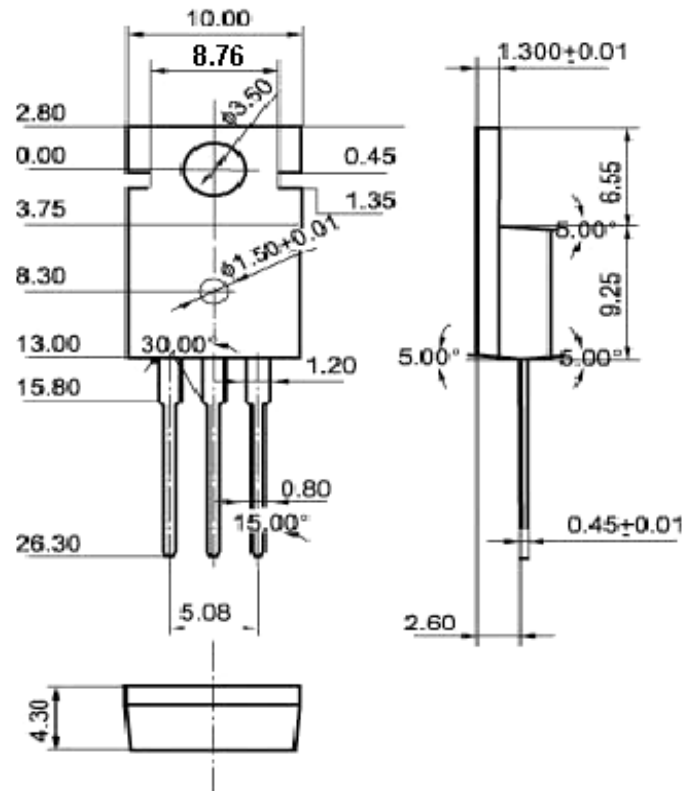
Outline dimensions (unindicated tolerance:  $\pm 0.1$ mm)
